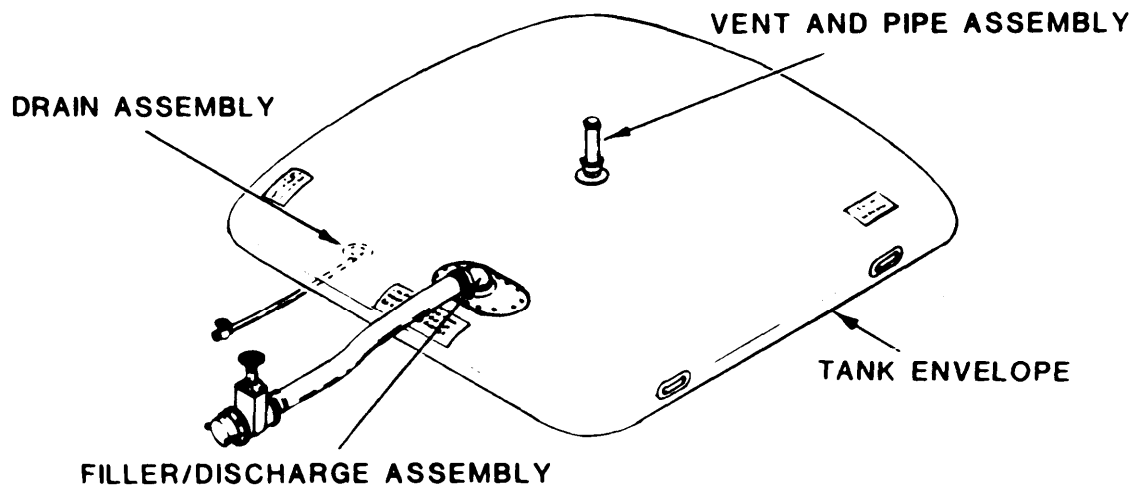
Collapsible 3000 Gallon Tank Assembly
